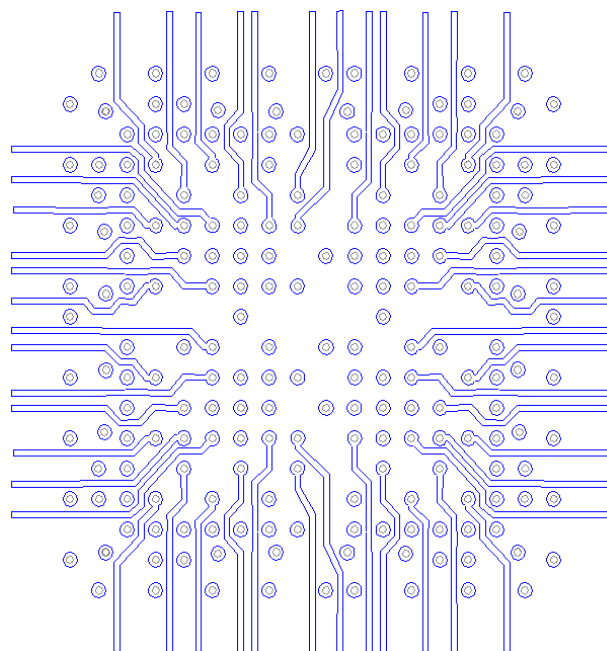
• Suggested Board Layout of Soldered Pads for CS196 CSPs (PCB Lower Layer)
